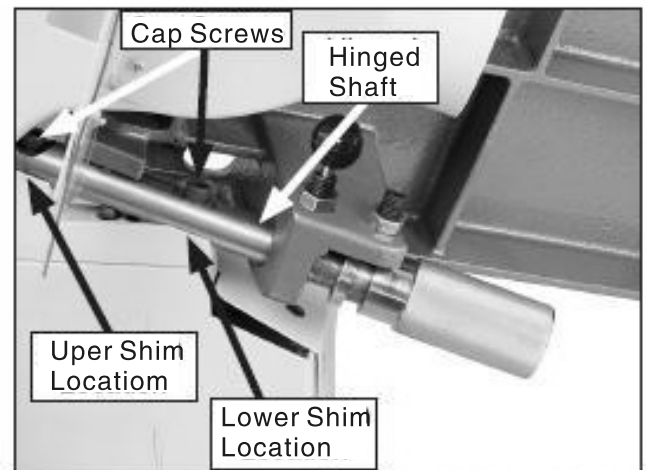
Infeed table hinged shaft. (Jointer table raised for clarity)
